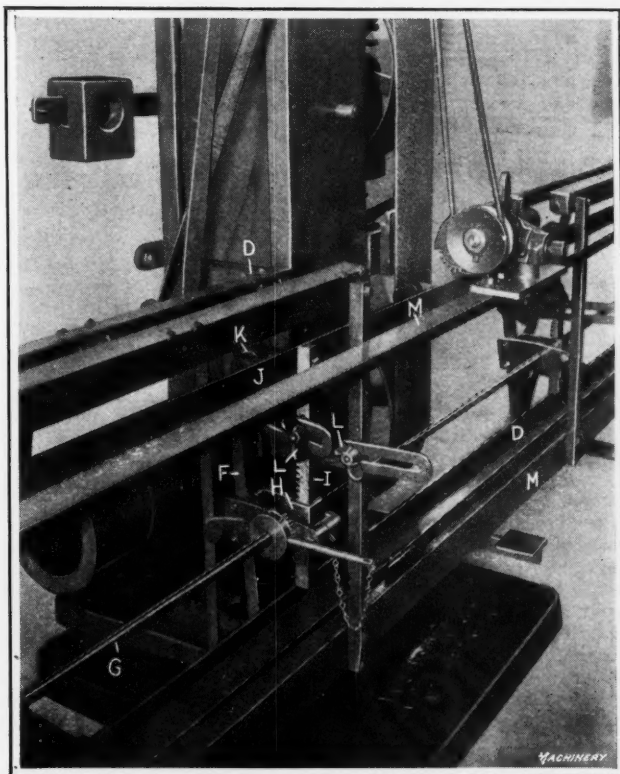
Close-up Rear View of Blevney Polishing Machine
